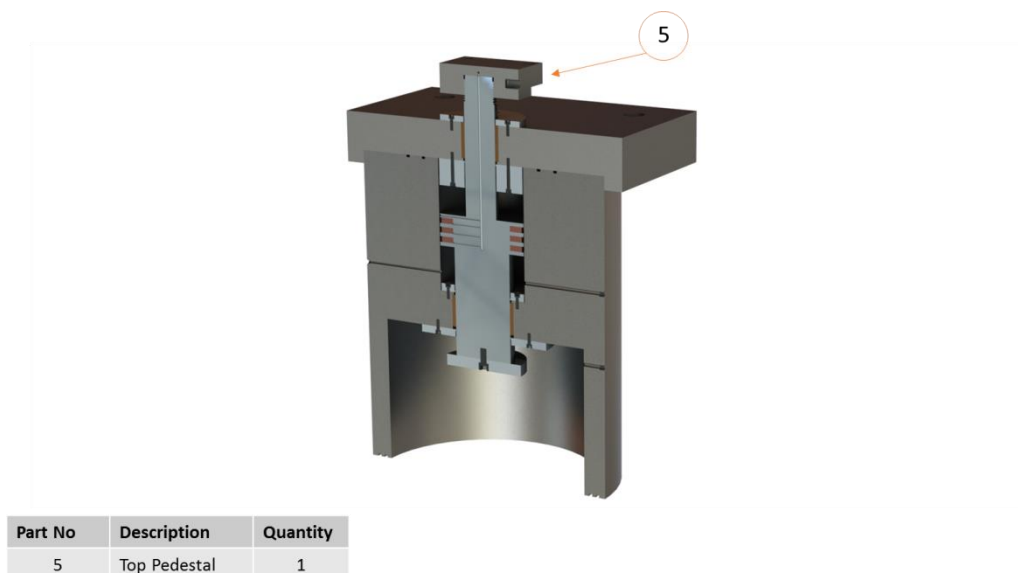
Step 6: Install the top pedestal on the on the top side of the shaft.
